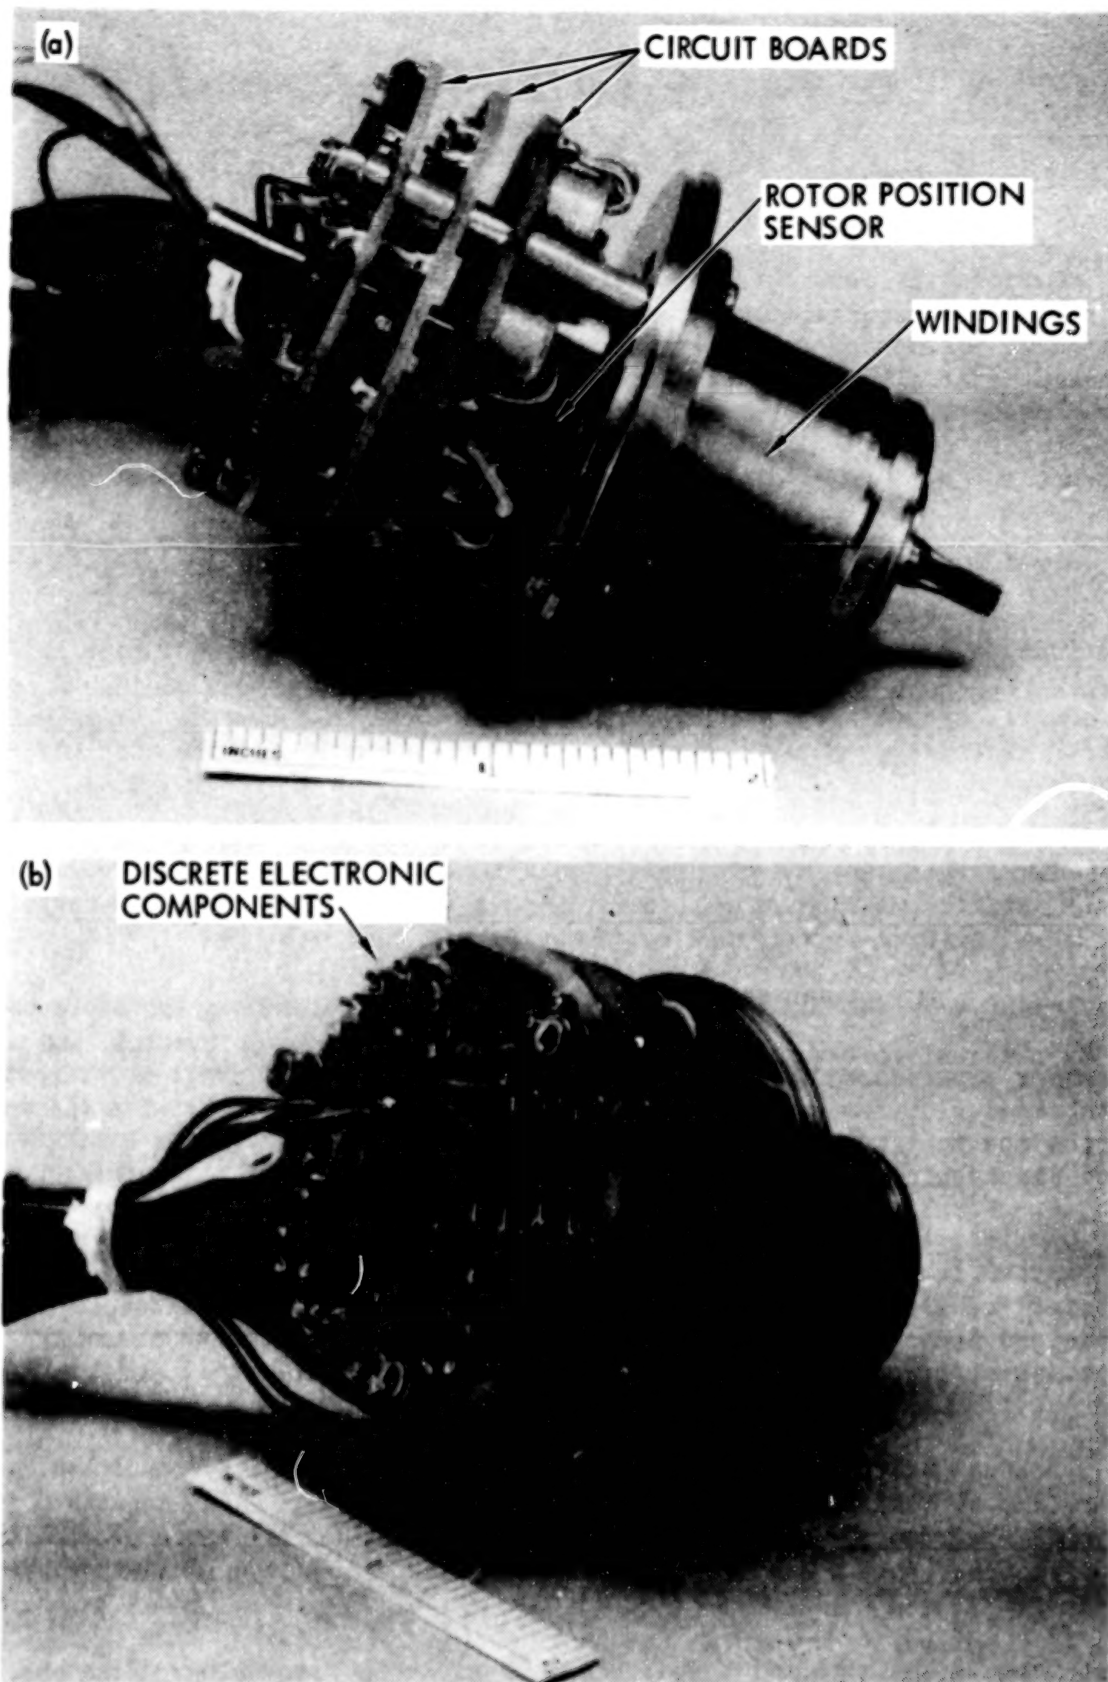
Dual drive motor: (a) side view, (b) rear view (rear cover removed)
